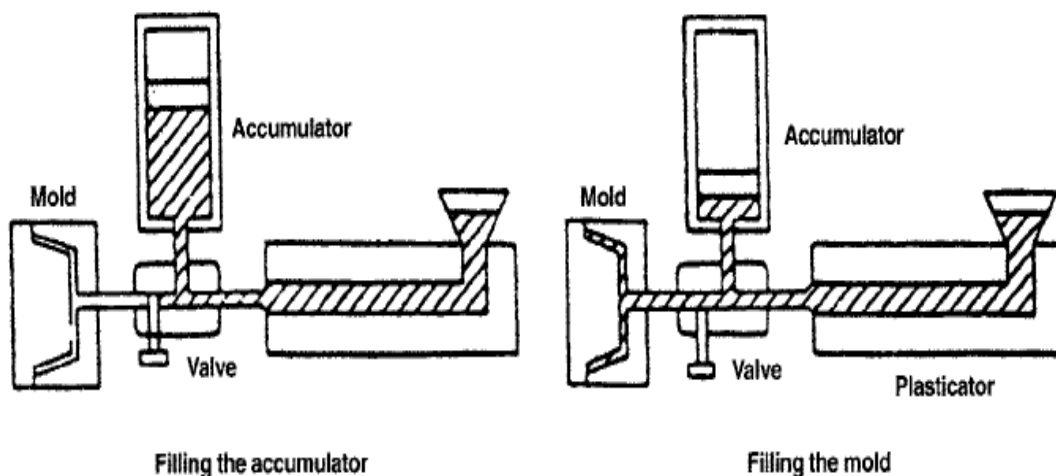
Low pressure foam reciprocating injection molding machine [85].
